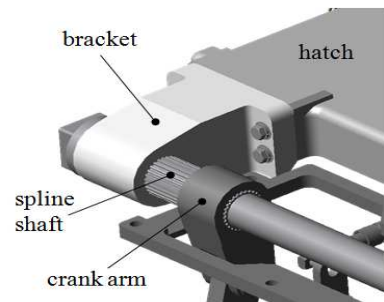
Spline shaft assembly configuration of the hatch rotation shaft
